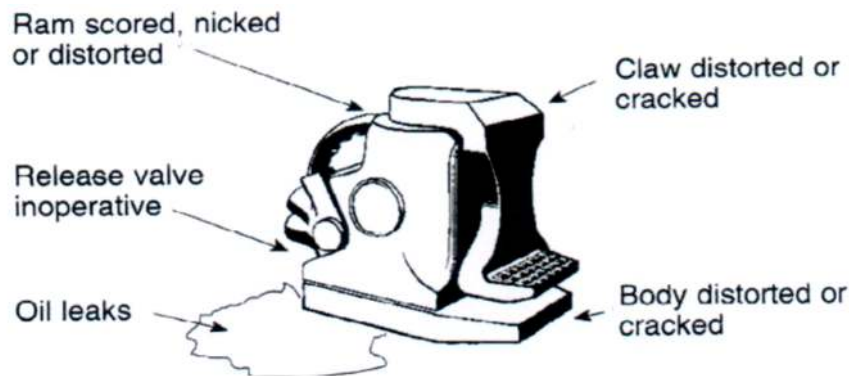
Inspection points and possible defects of hydraulic jacks
